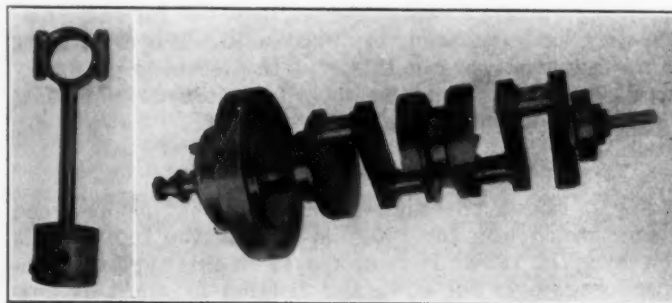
THE CONNECTING-ROD AND PISTON AT THE LEFT AND THE CRANKSHAFT, FLYWHEEL AND CLUTCH AT THE RIGHT
